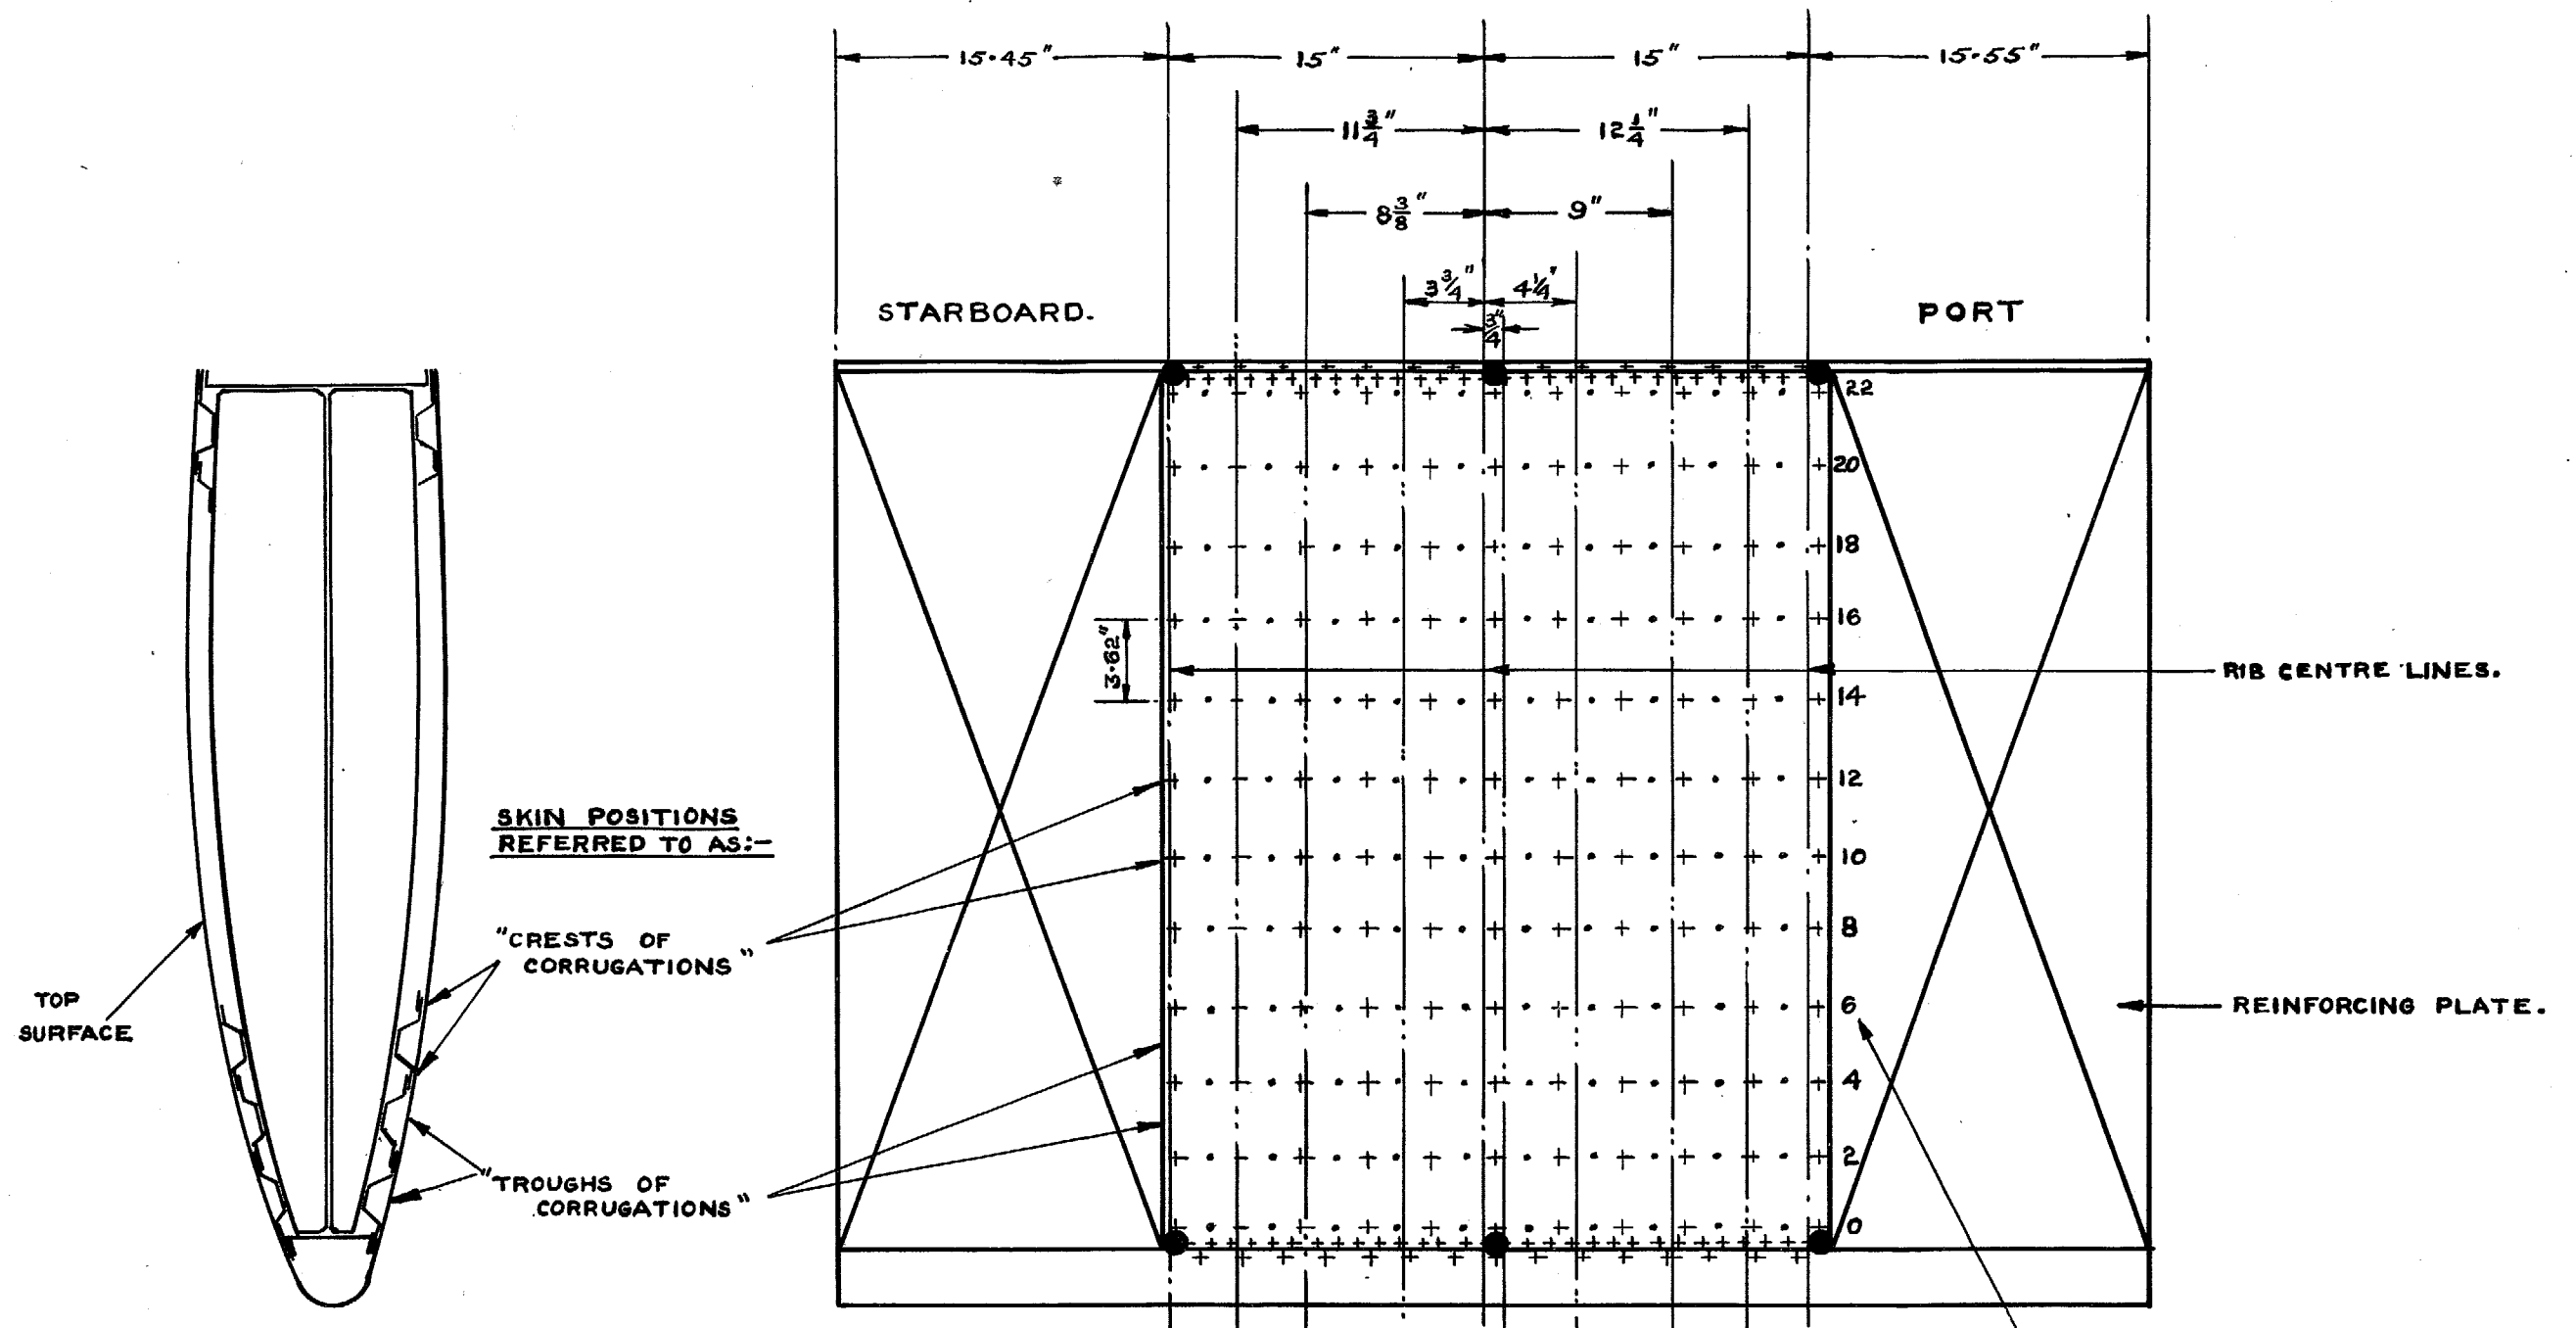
End View of Panel Cut from Top Surface of Specimen.
